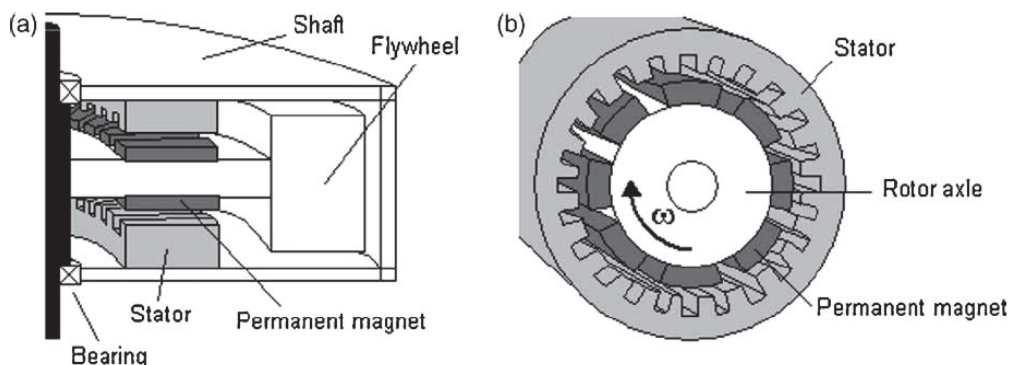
Possible electric machine designs for flywheel rotor: axial type (a) and radial type (b)
